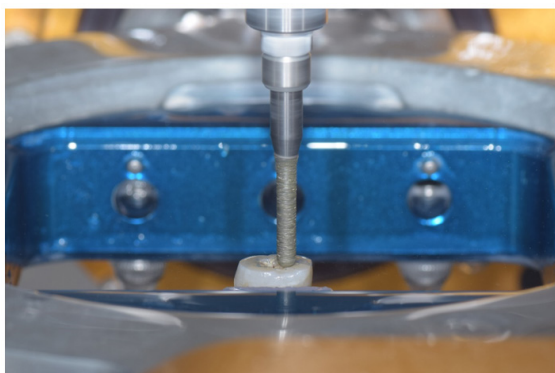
Preparation of Tooth Specimen using 5x - 400 Arum Milling Machine
